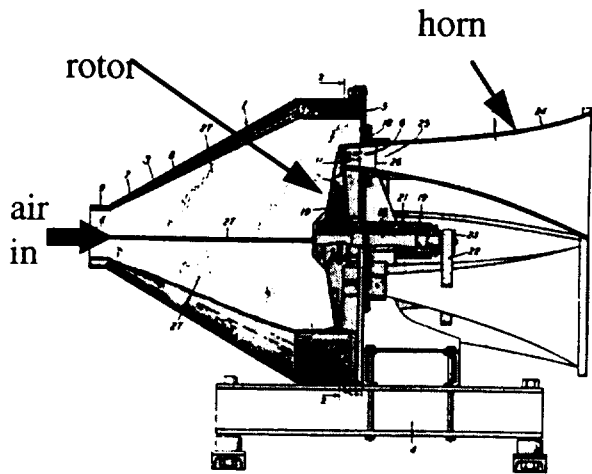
A sketch showing a cross-sectional view of the siren. The rotor is seen edge-on.
